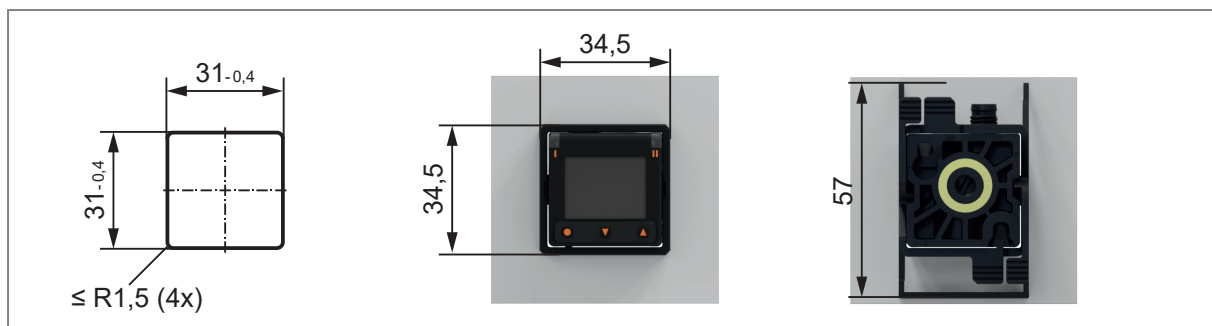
Panel mounting using a fixing clamp (panel cutout; front view; rear view)
